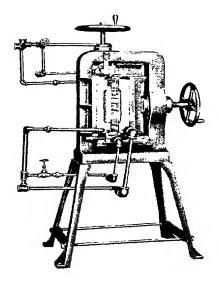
Hand-operated press for tube-blowing molds. Note upper manifold raised to clear ends of tubes. Lower manifold is moved horizontally to position midway between open dies and thus used as ejector for tubes.
